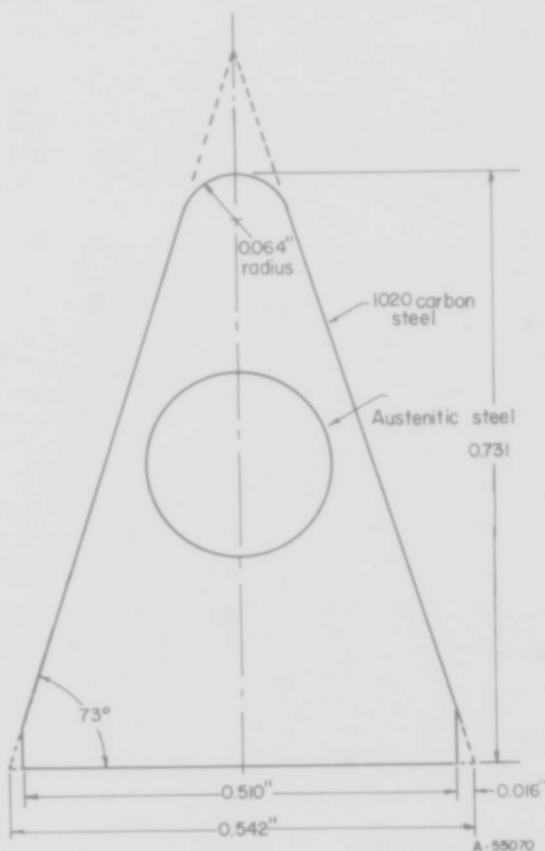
COMPOSITE FILLER BAR USED IN MECHANICAL-ASSISTED FILLER-REMOVAL EXPERIMENTS⁽³⁾
